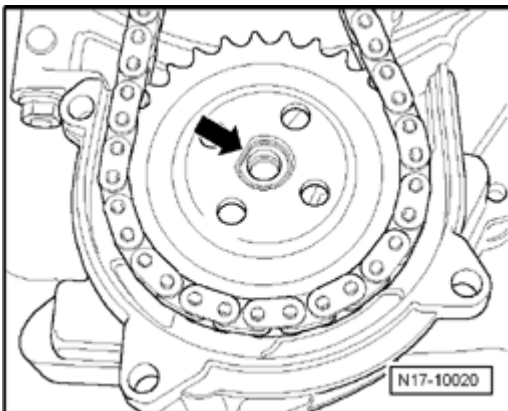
Installation Position Of Chain Sprocket For Oil Pump Drive
